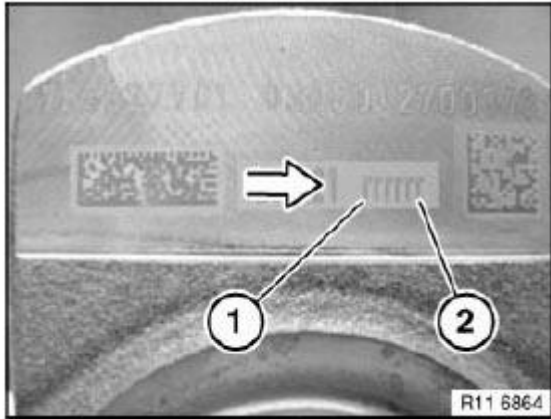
Direction Of Fitting Color In Connecting Rod And Connecting Rod Bearing Cap
